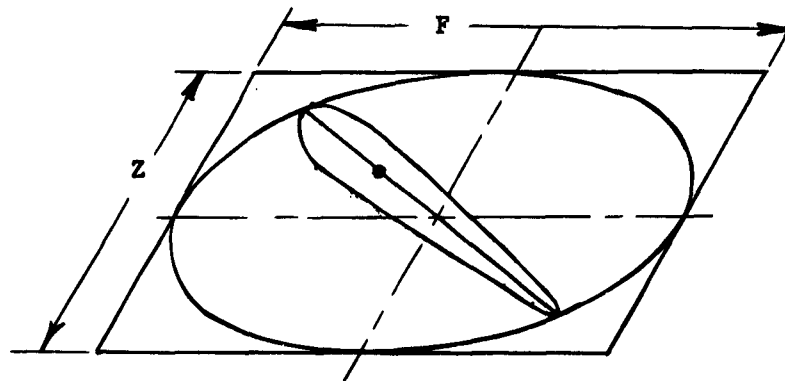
ACTUAL CONTACT AREA OF SPIRAL BEVEL GEARS UNDER LOAD
